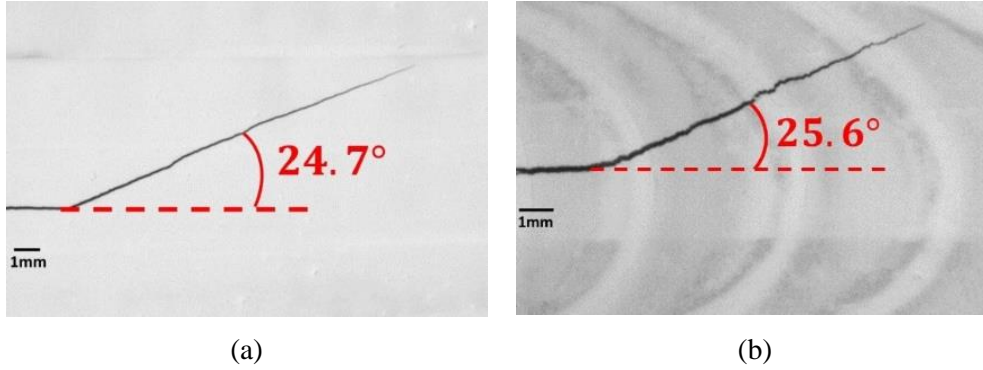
Crack growth paths for loading angle $\beta = 30^\circ$ in (a) non-welded specimen (b) welded specimen.
